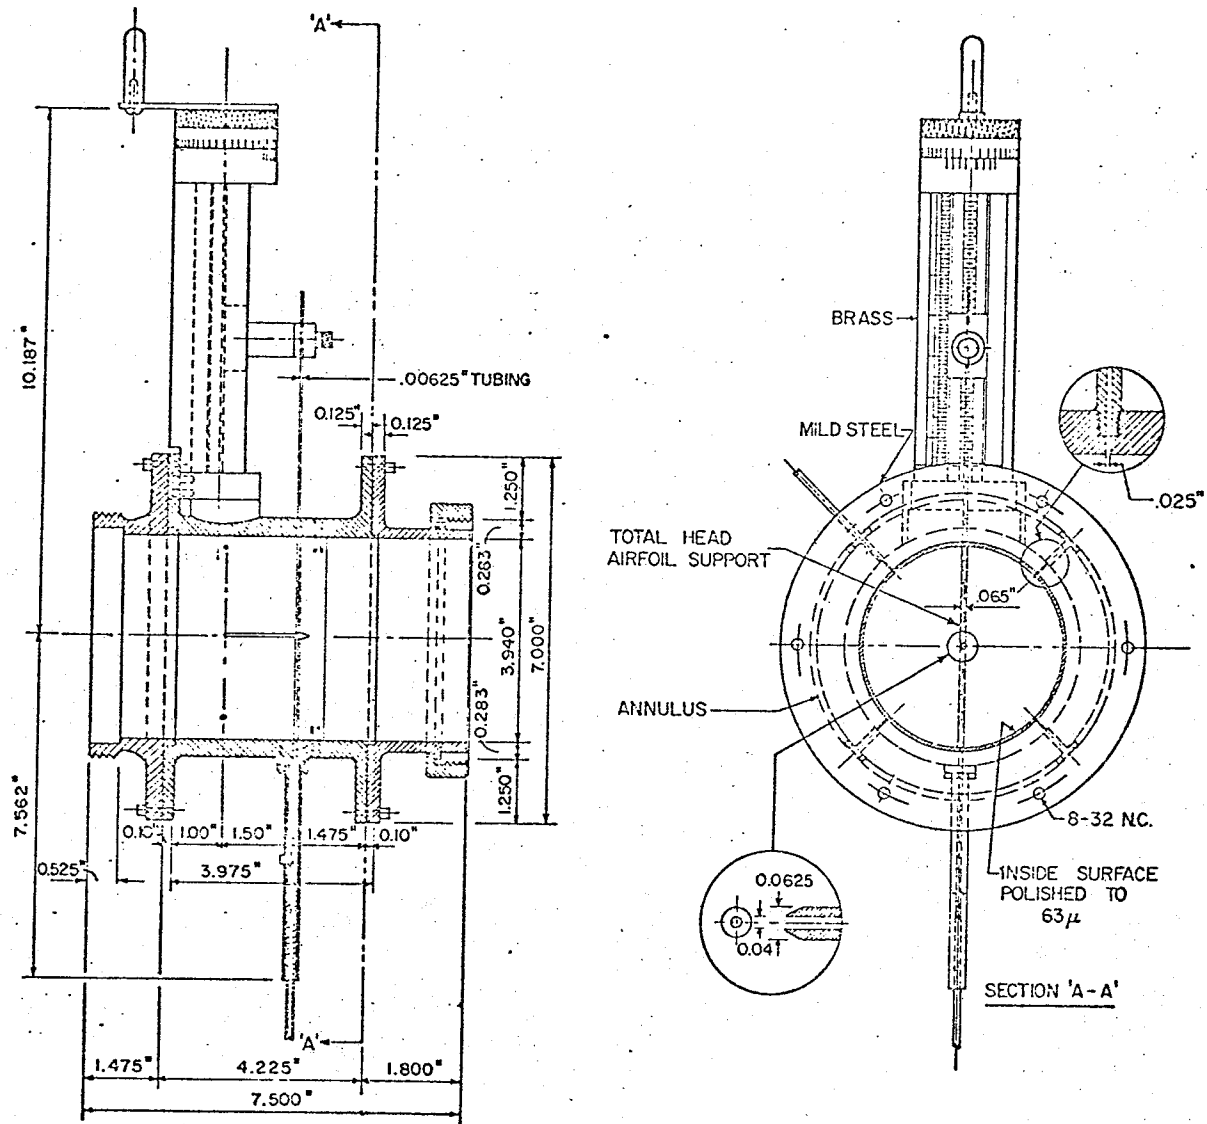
PITOT TUBE TRAVERSING MECHANISM
